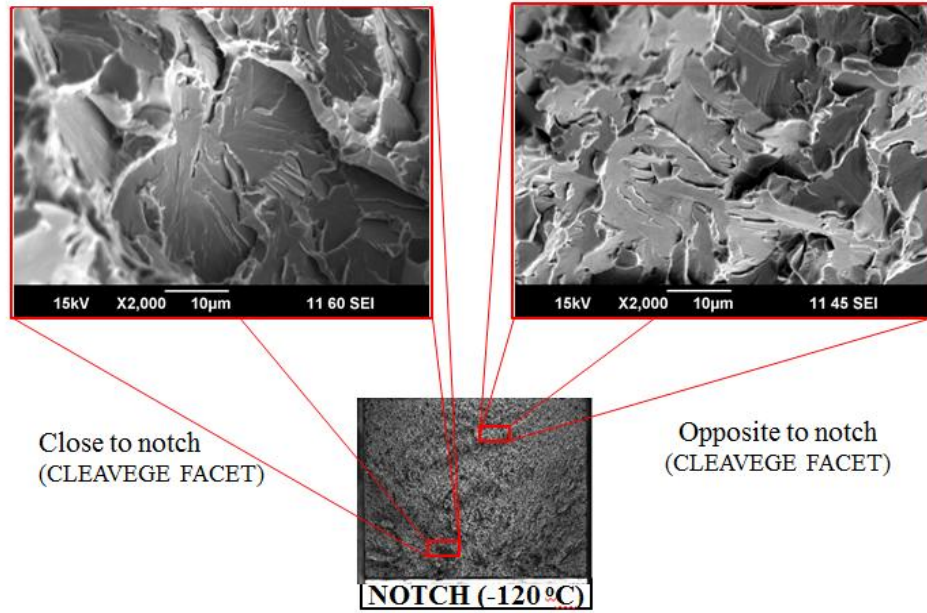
Fracture surface for 10 mm thick CVN specimen at -120°C.
